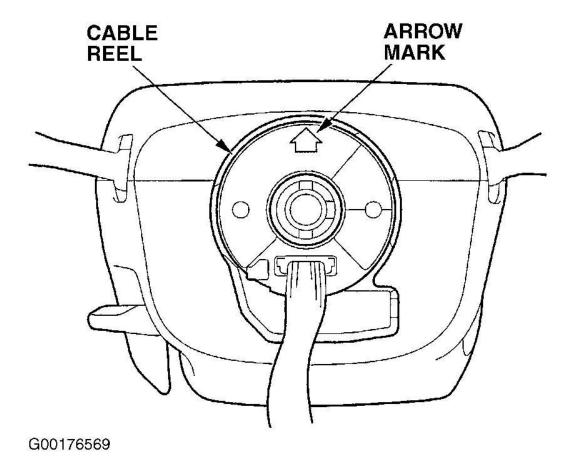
Centering Steering Wheel For Installation (All Models) Courtesy of AMERICAN HONDA MOTOR CO., INC.
